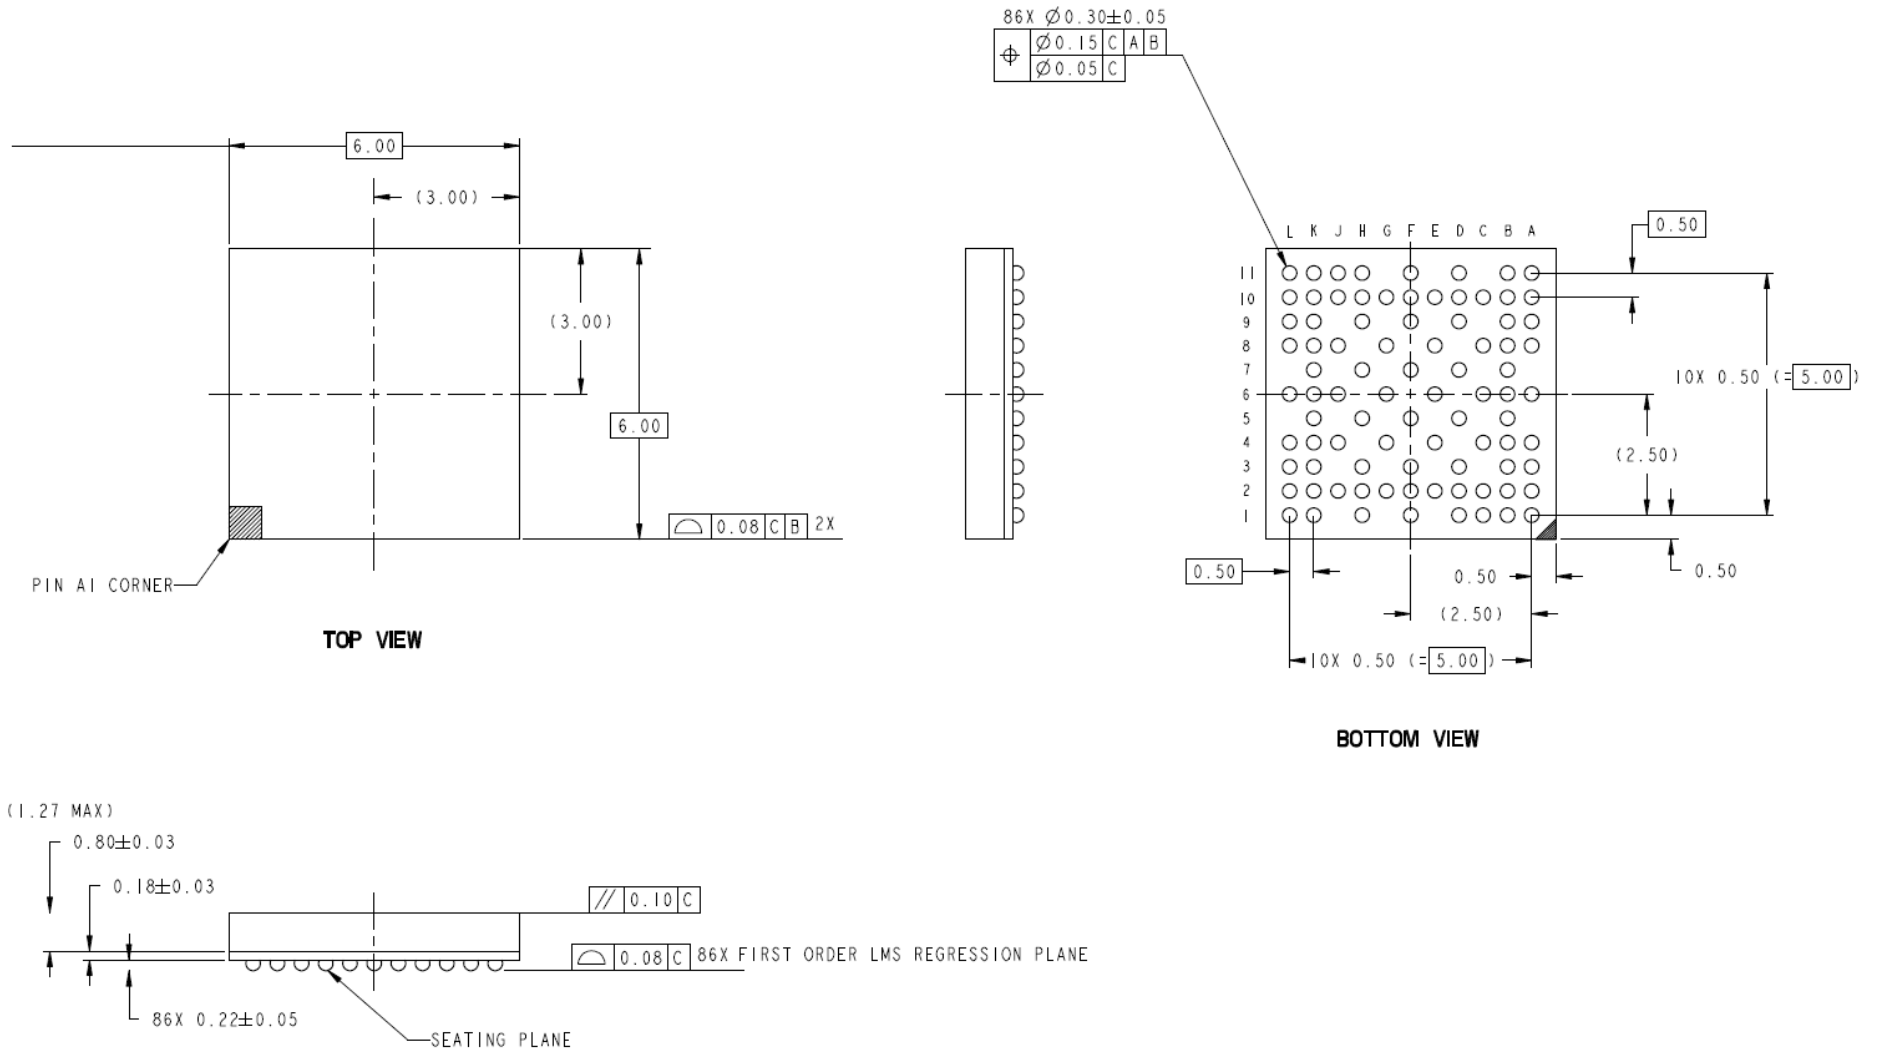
86 pin CSP (6.0 x 6.0 x 1.27 mm) outline drawing
